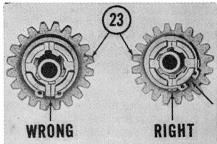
View of fourth gear positioning pieces and snap ring (3-Fig. \$10-10) assembled. Split in positioning pieces and opening in snap ring should not be aligned.
